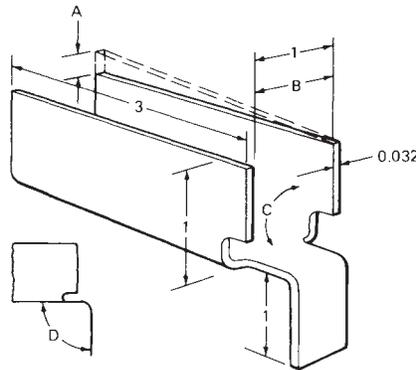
Spring clip representing a type of beryllium-copper part that should be partially aged without a fixture and then placed on a mandrel for final aging, for control of diameter
